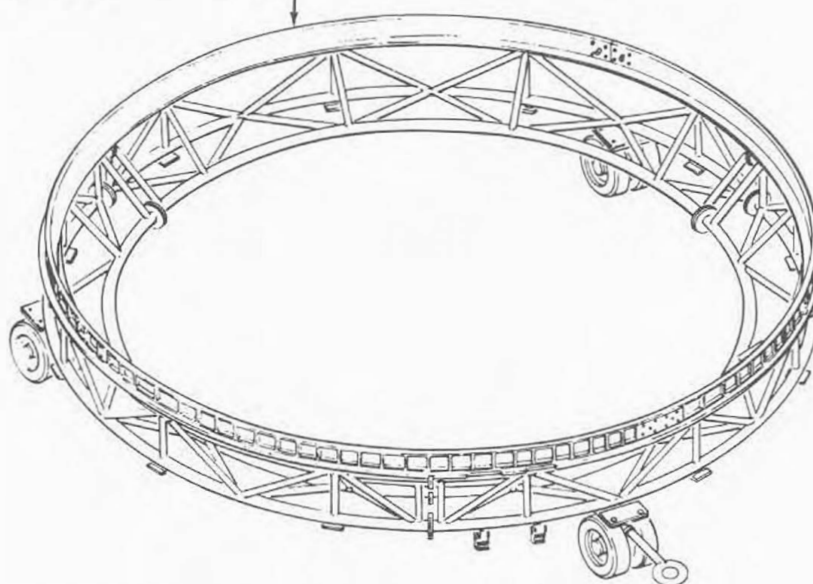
I. U. Handling and Auxiliary Equipment (Sheet 7 of 7)
